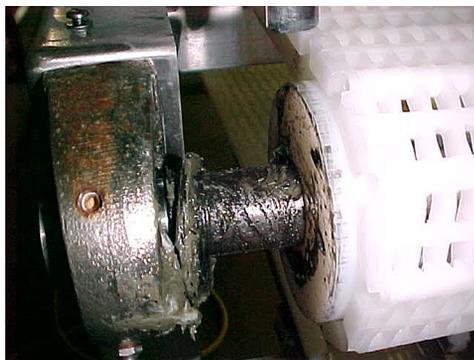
Avoid over-lubrication. Excessive lubricant and grease should be removed to prevent them from coming into contact with the product. *Courtesy of John Butts, Land O’Frost.
